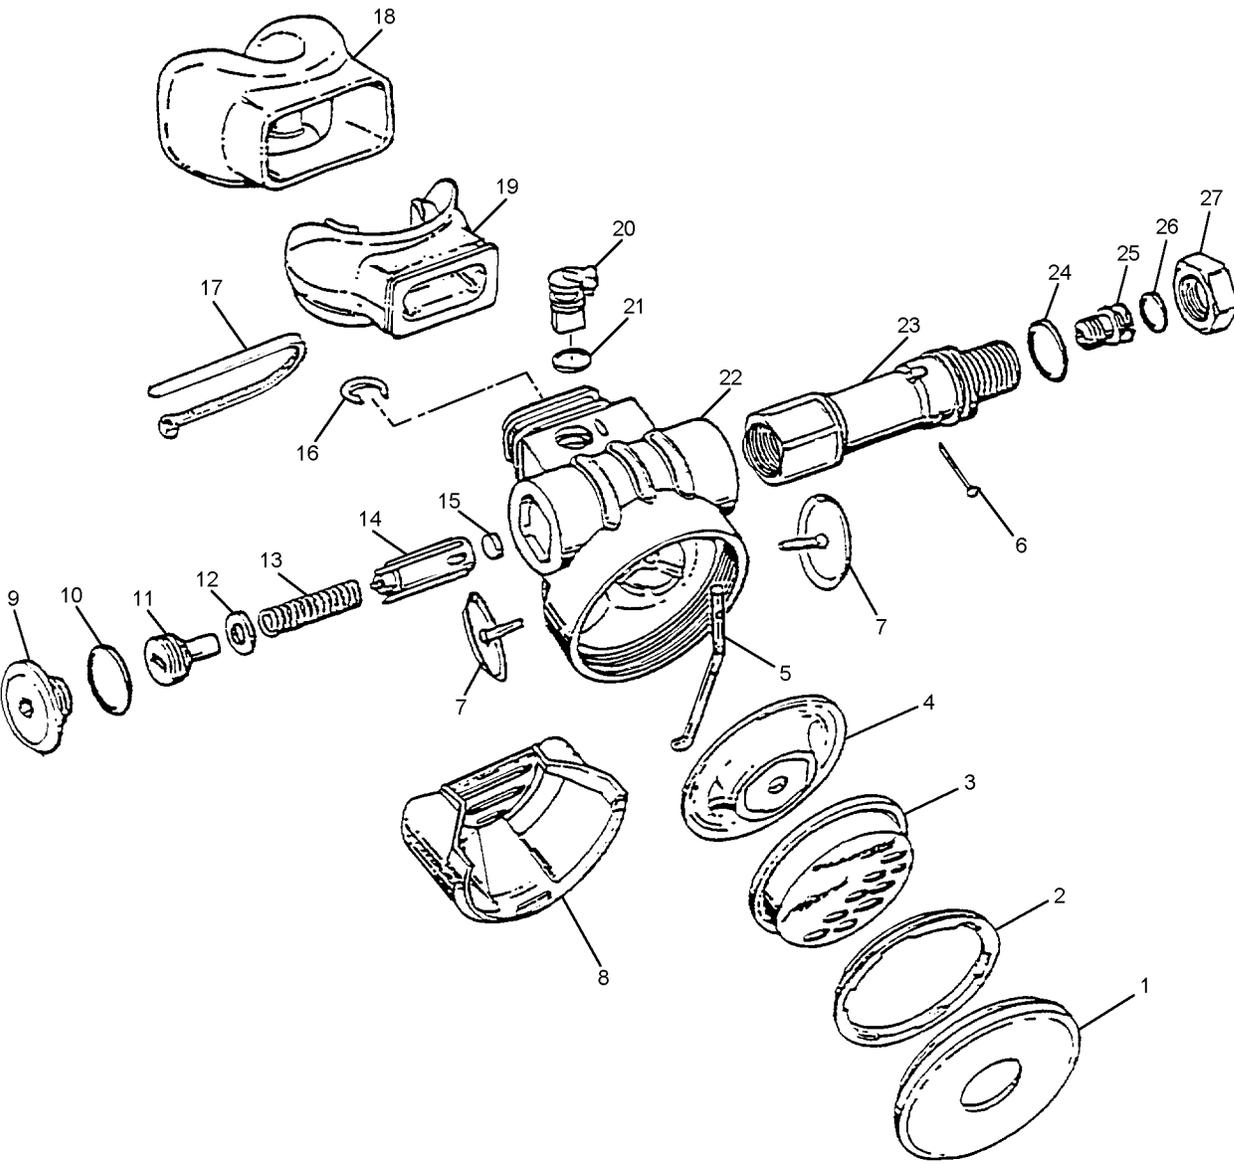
Second-Stage Regulator Assembly (Sheet 1 of 2)
